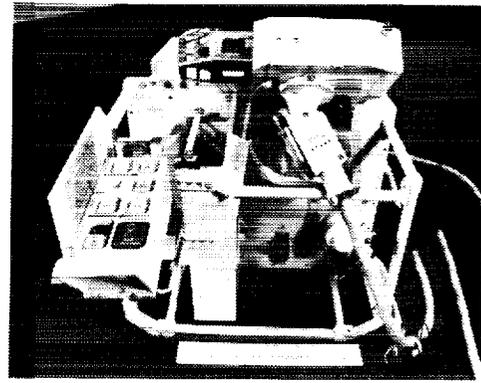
Paton-Developed Universal Hand Tool Space Welding and Metal Processing System
